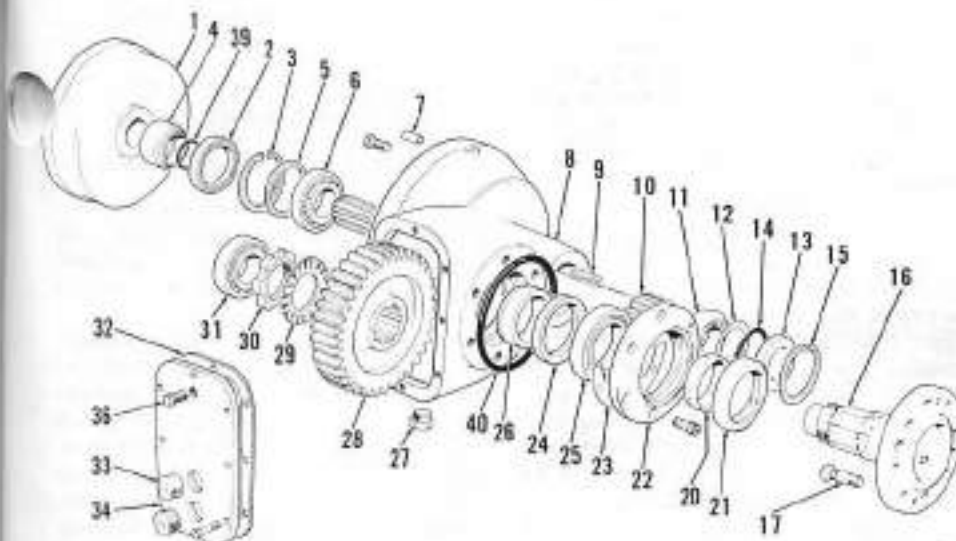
Exploded view of Model 885 final drive assembly. Axle shaft taper bearings (25 & 31) are adjusted by varying thickness of shims (23). Bearing (21) is installed in blind hole from inside housing (8).
